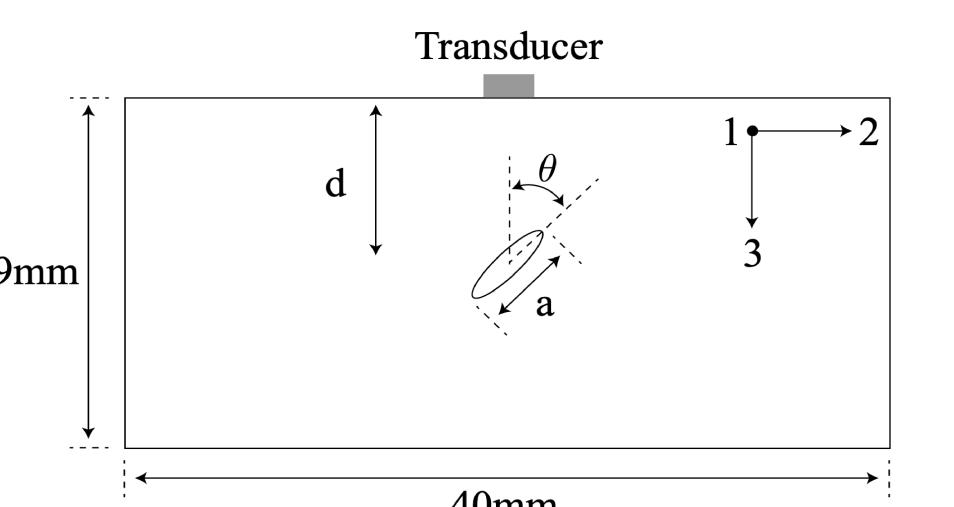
Cross-sectional view illustrating crack length a , the crack position d , and the crack orientation θ of the steel block on its symmetry plane.
